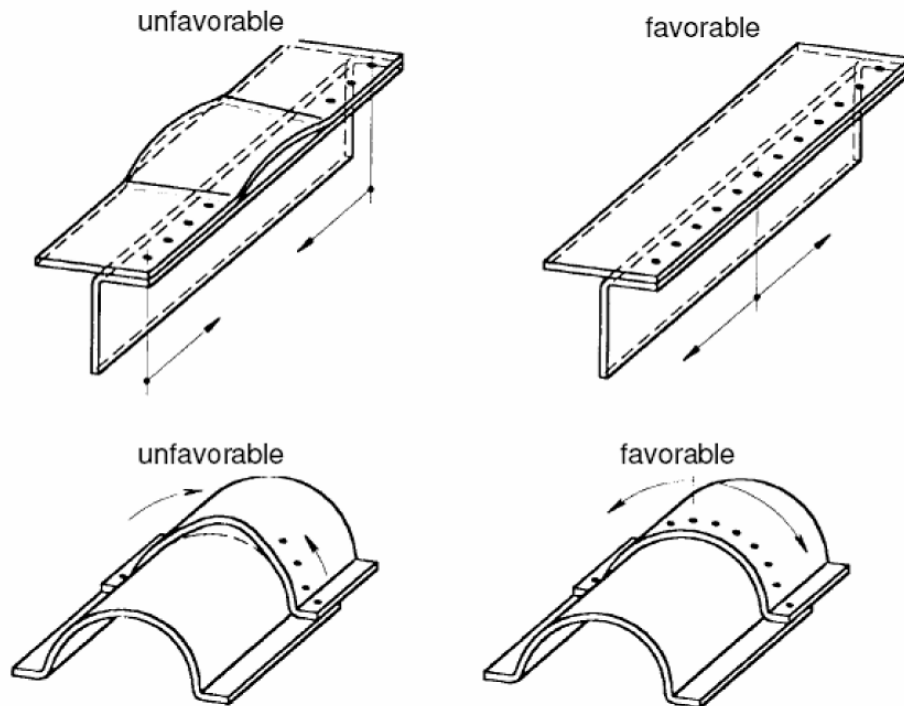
Welding sequence to avoid the formation of cavities
